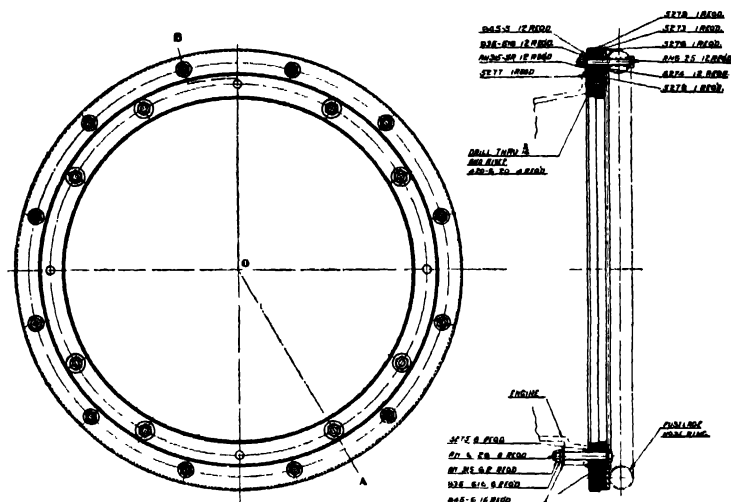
Thermoid Engine Mount Assembly for Fairchild-Caminez Engine.
